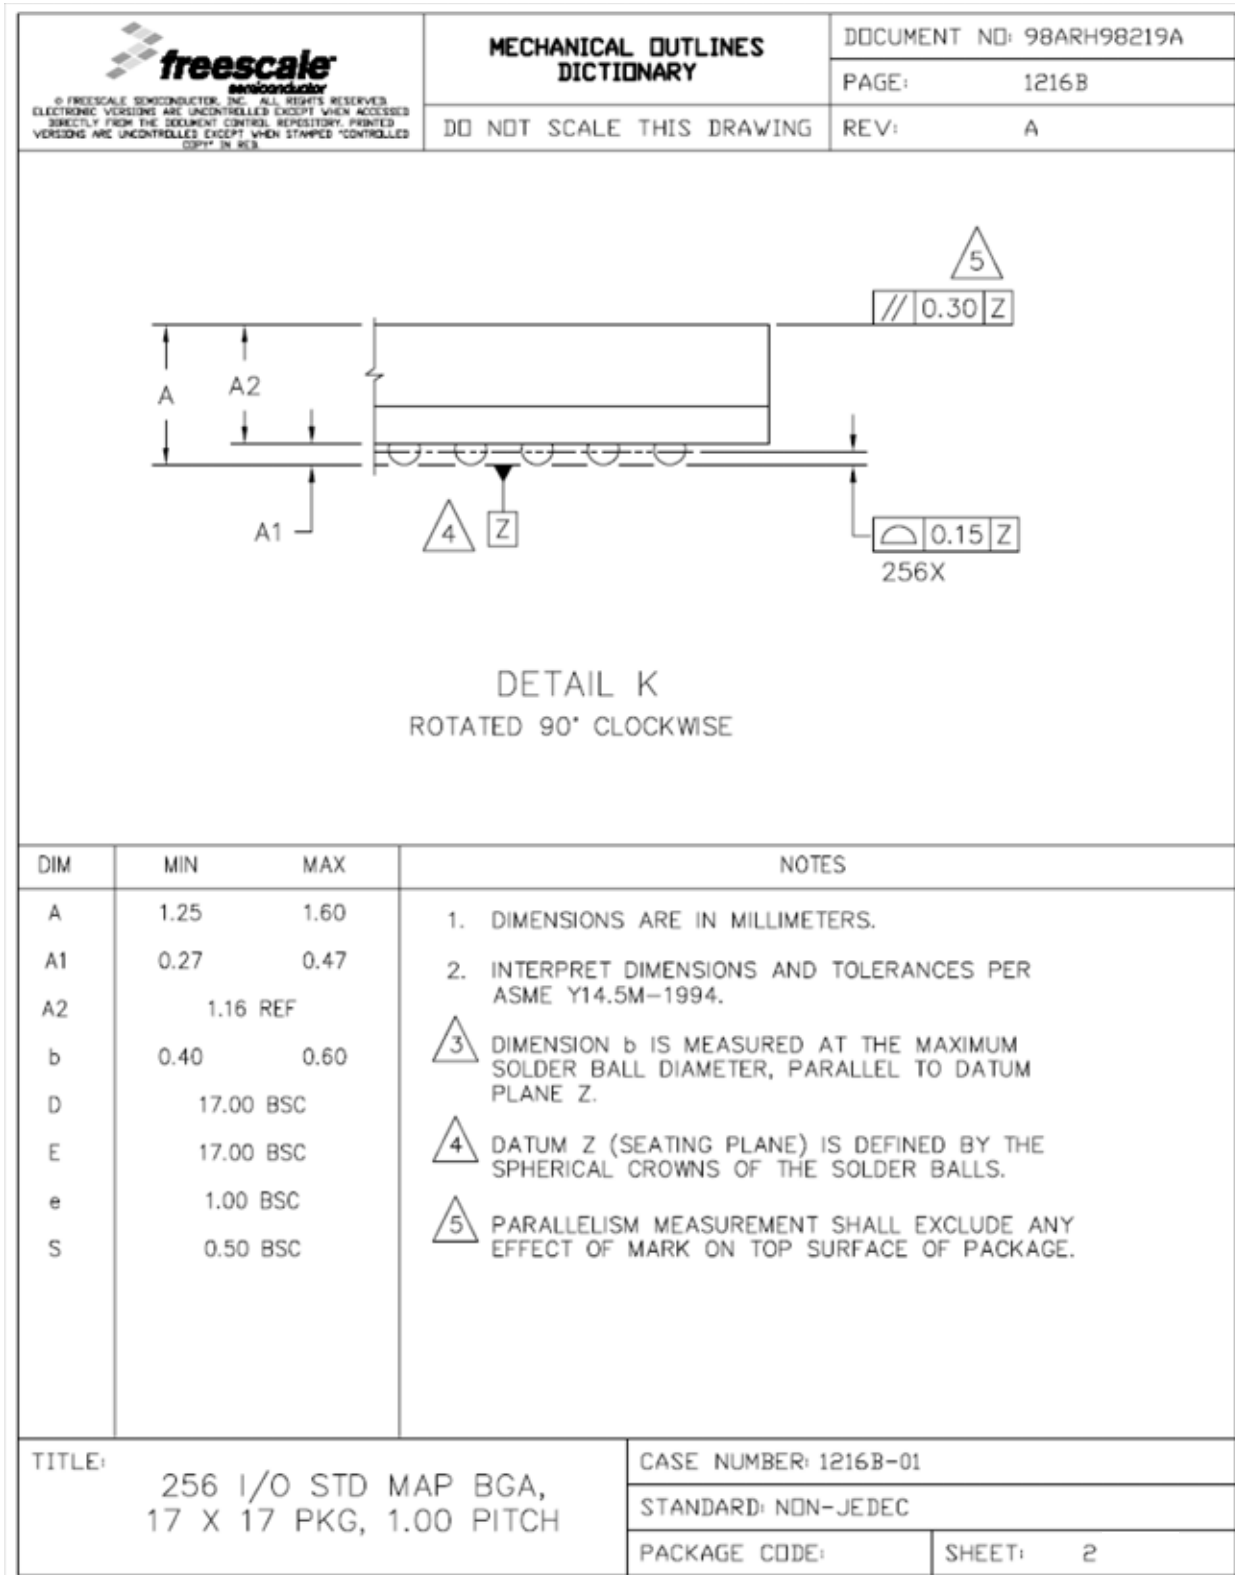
256 MAPBGA mechanical drawing (Part 2 of 2)
